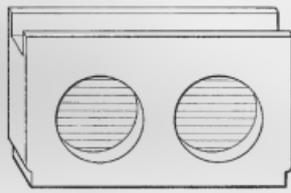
The Oddur type-bar machine; grooved slug for short type. Scale: twice full size.
